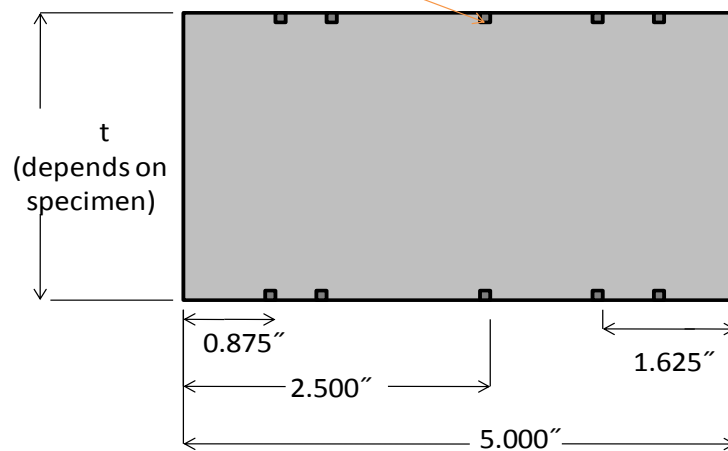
The hot and cold surfaces of both PC159 and PC287 epoxies had a different thermocouple groove pattern than the stainless steel.
